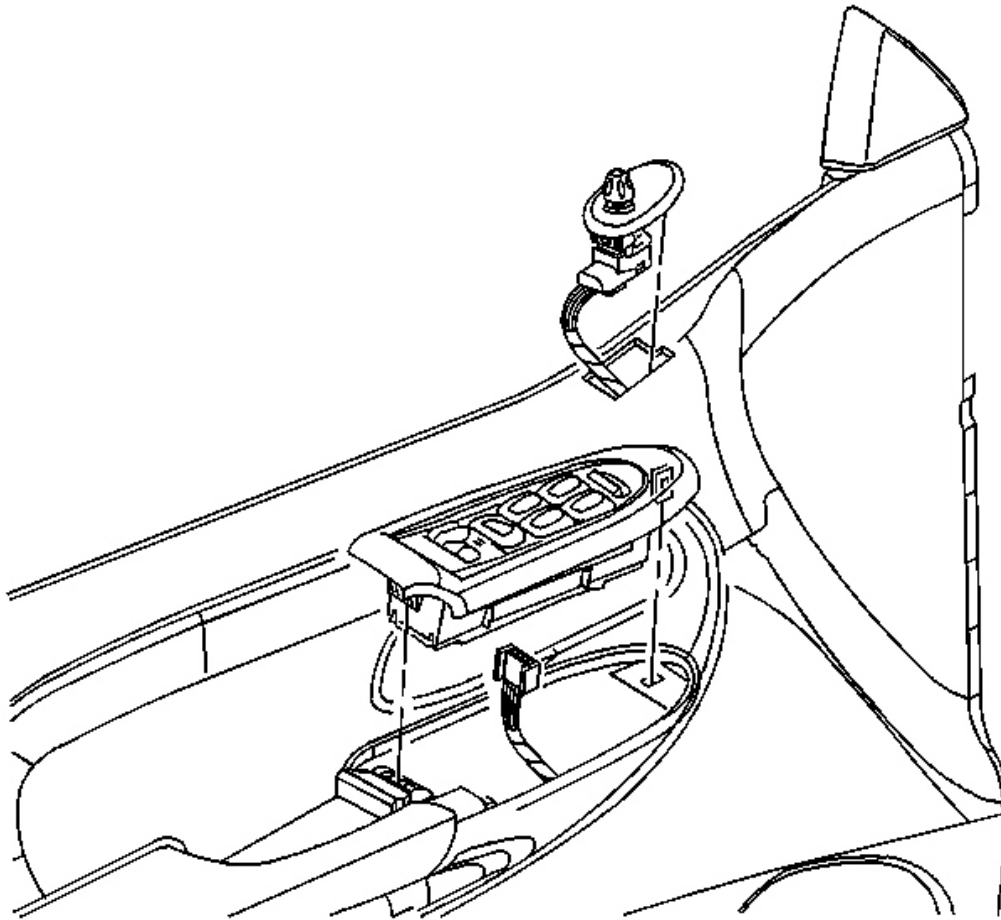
View Of Power Mirror Switch & Driver Master Switch
